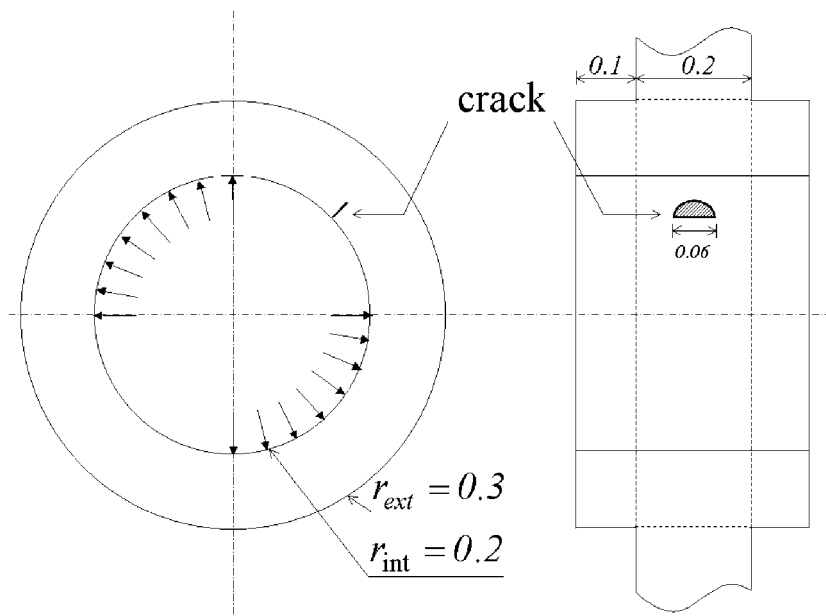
Zoom on the part: face and side view to show the location of the semi-circular crack and the loading.
